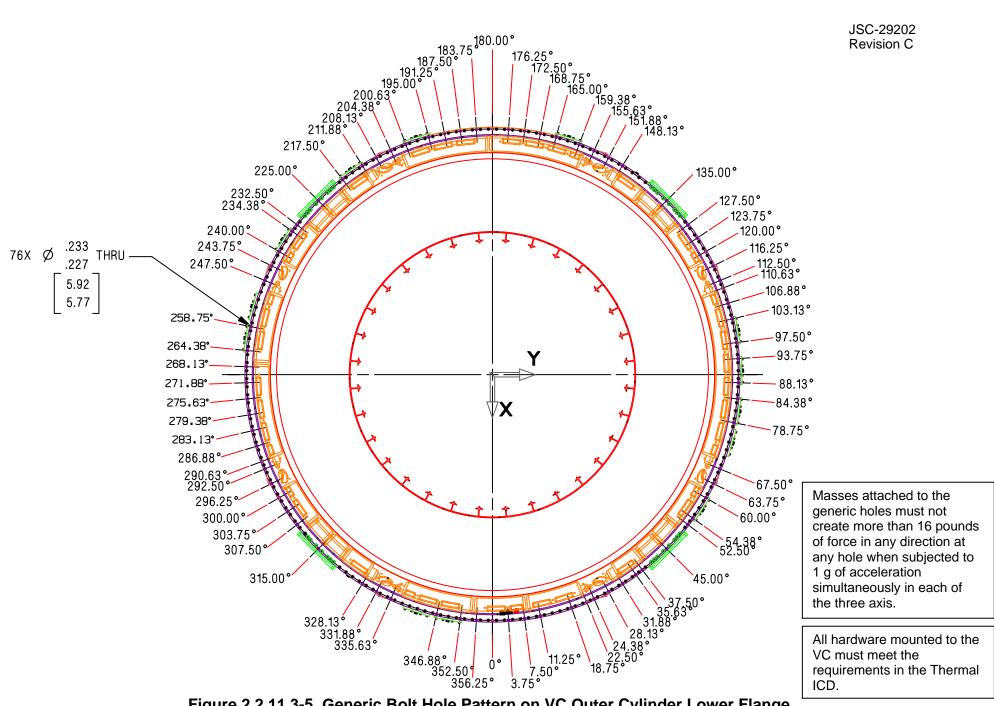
Generic Bolt Hole Pattern on VC Outer Cylinder Lower Flange
